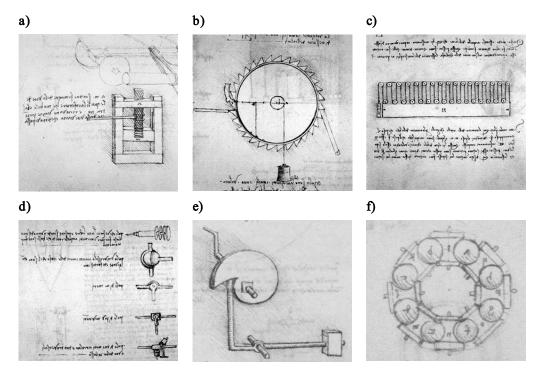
Leonardo's components of machines [Institute and Museum 2005]: a) differential screw, b) ratchet wheel with slanted pawl, c) block of 33 pulleys, d) various types of axle supports, e) Hammer driven by eccentric cam, f) pressure-resistant ball bearing
